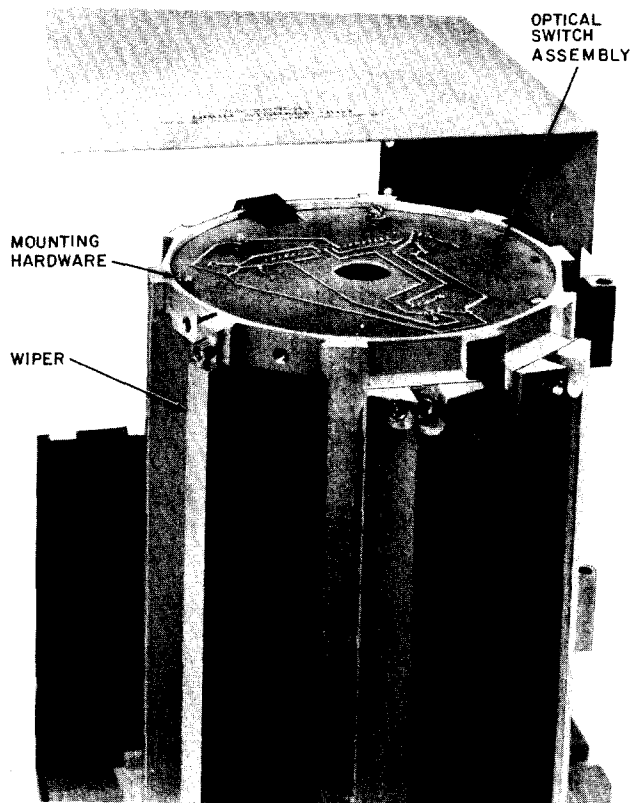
Optical Switch Assembly—Mounted (Viewed With DSU Cover Removed)
